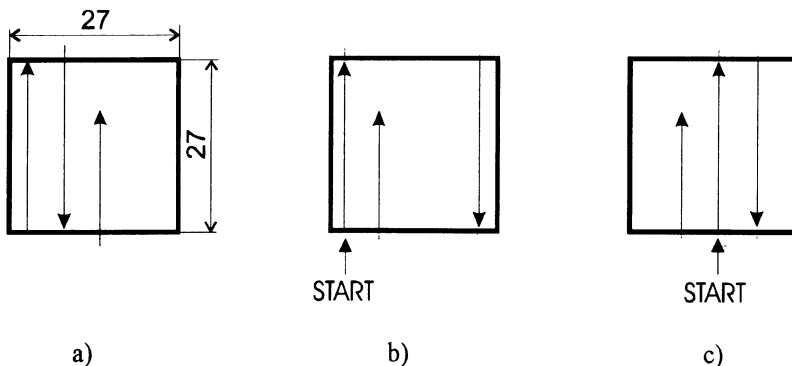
Workpiece geometry and different ways of laser beam travel in laser surface remelting.
